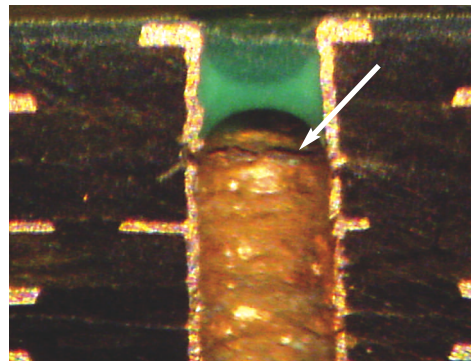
This cross-section image of a PCB via shows a crack that caused an open circuit. Stress, contamination, or insufficient plating might have caused the crack.
